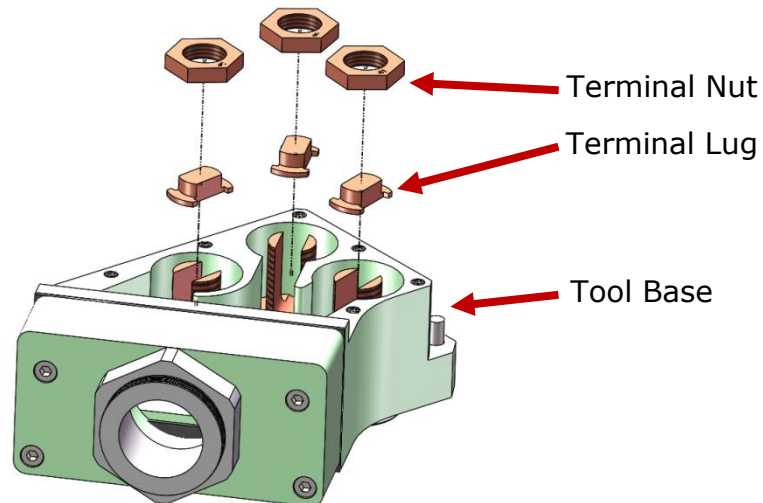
Remove/Install Terminal Nuts and Terminal Lugs
